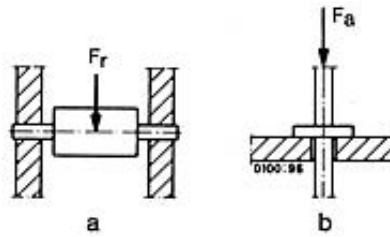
a radial plain bearing; b axial plain bearing (diagrammatic sketch)
